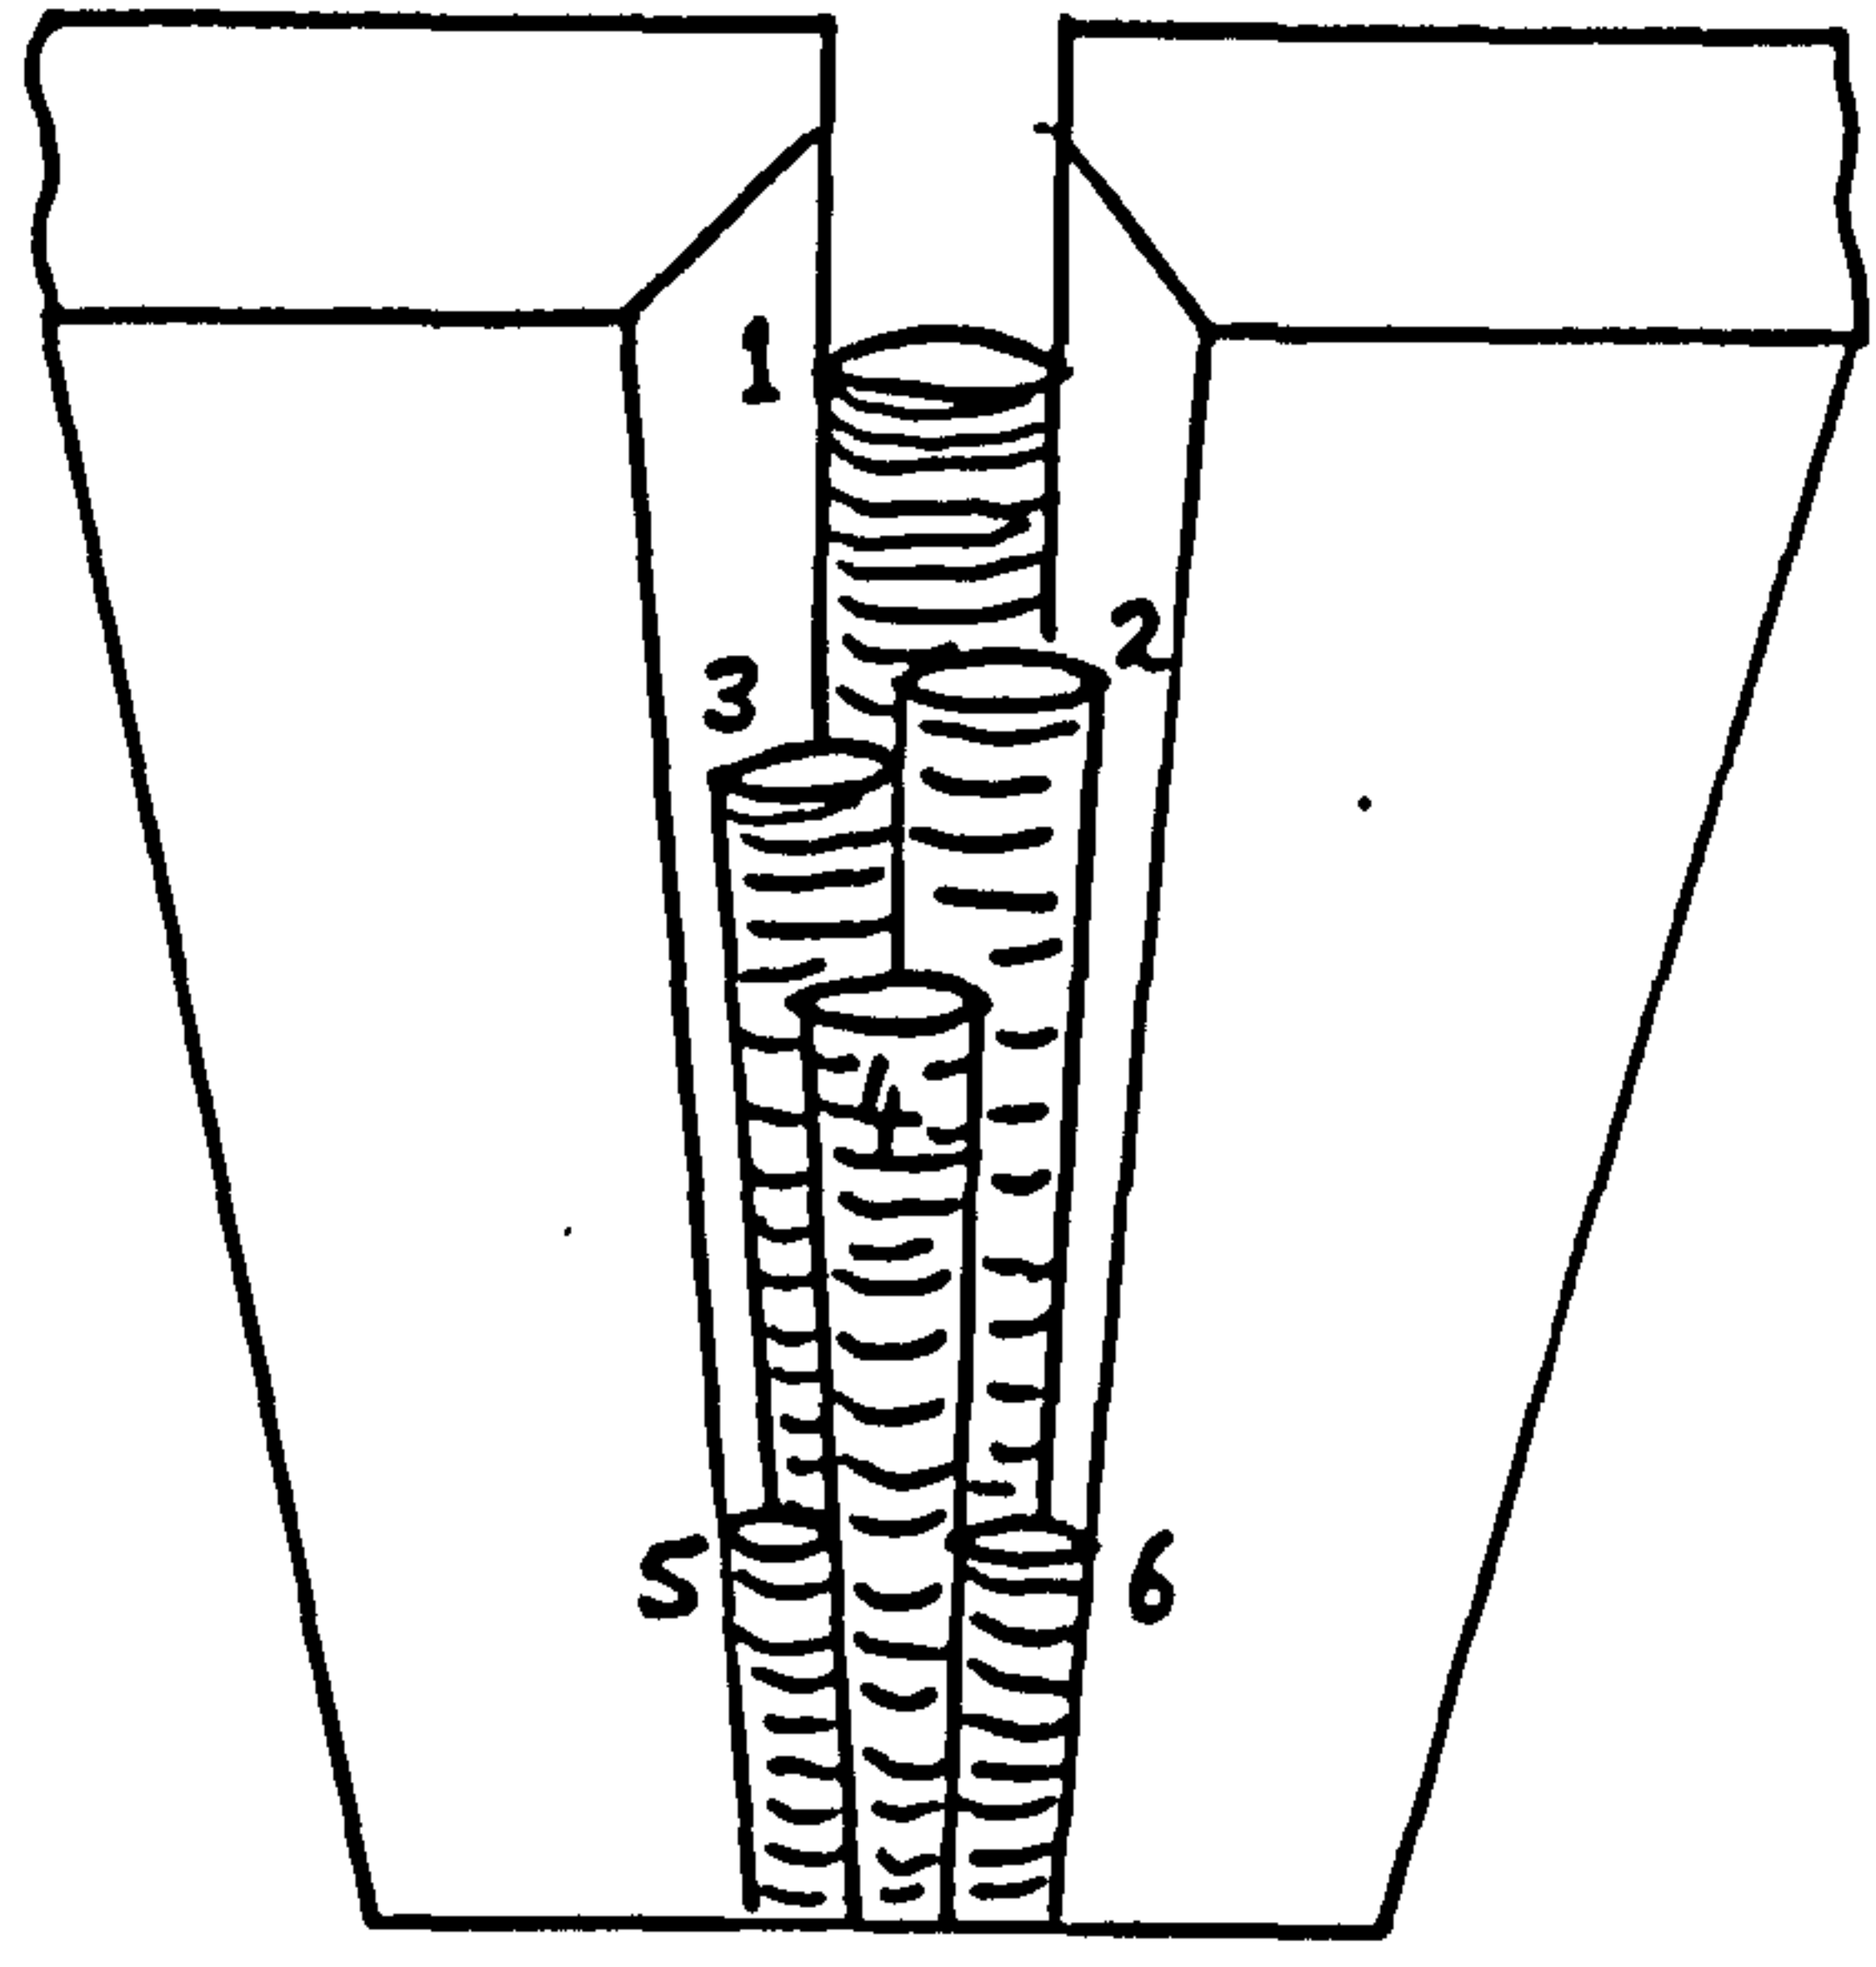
Ideal weld filler geometry, showing multipass welding. The first weld bead to be layed is No.1 and the last is No.6.
